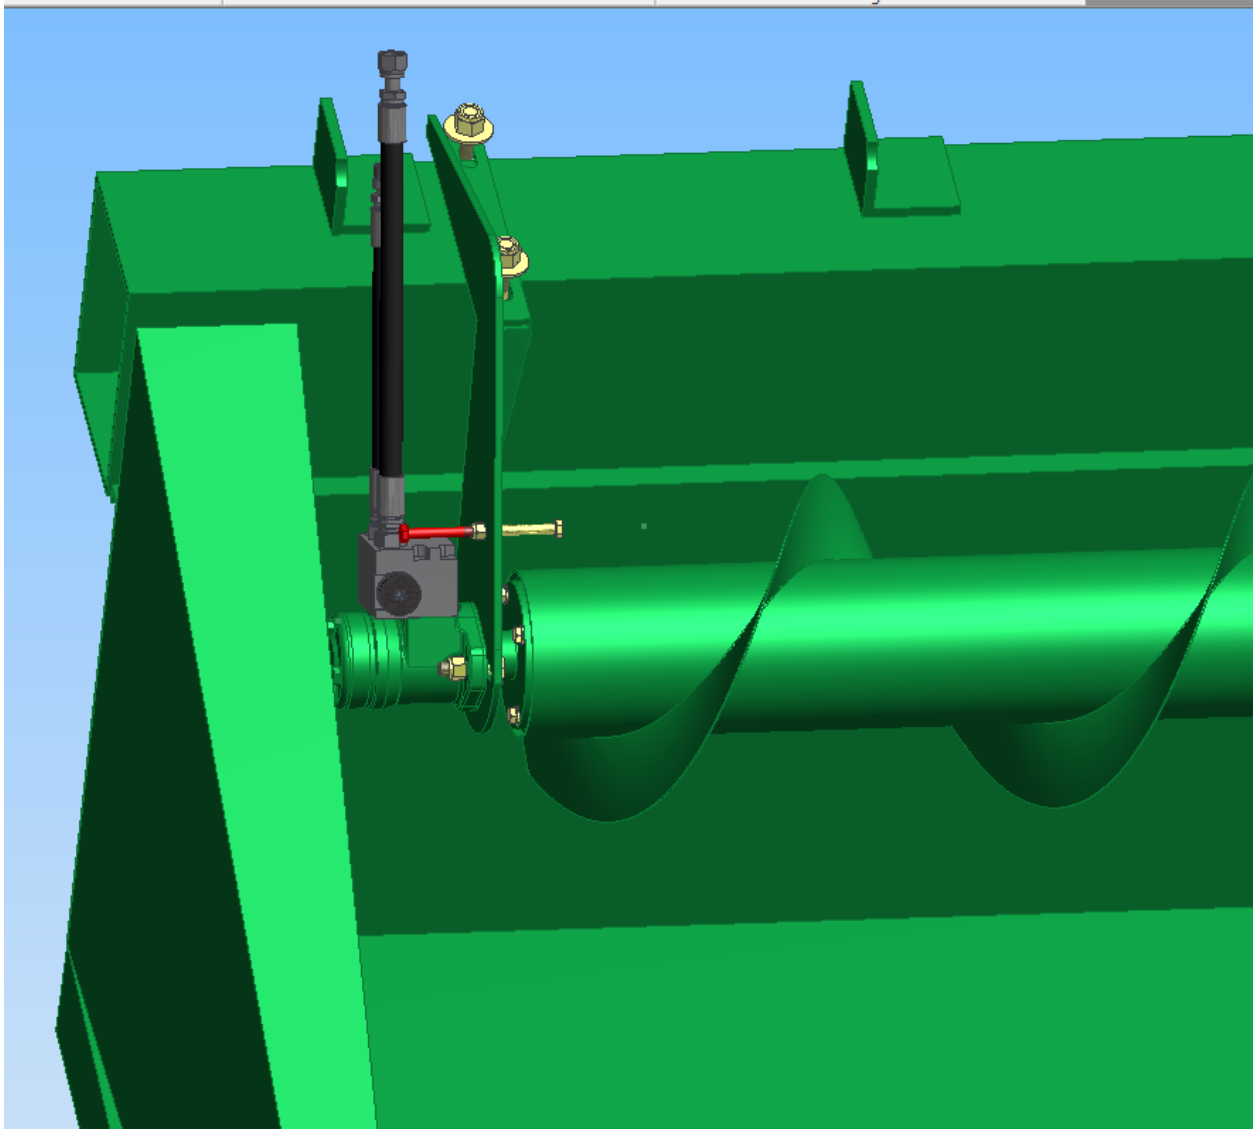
HYDRAULIC MOTOR ON DIRECT DRIVE WITH MOUNT AND STOP BOLT IN ON AND OFF (RED) POSITIONS
